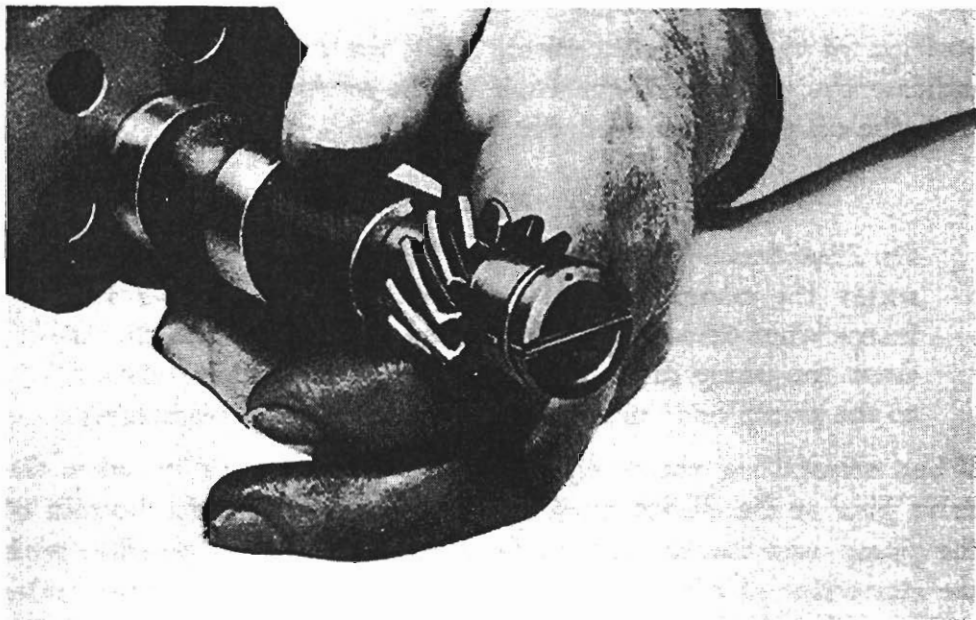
Showing Position of Drive Gear Prior to Installing Pump on Eight Cylinder Engine. Note Punch Mark.
